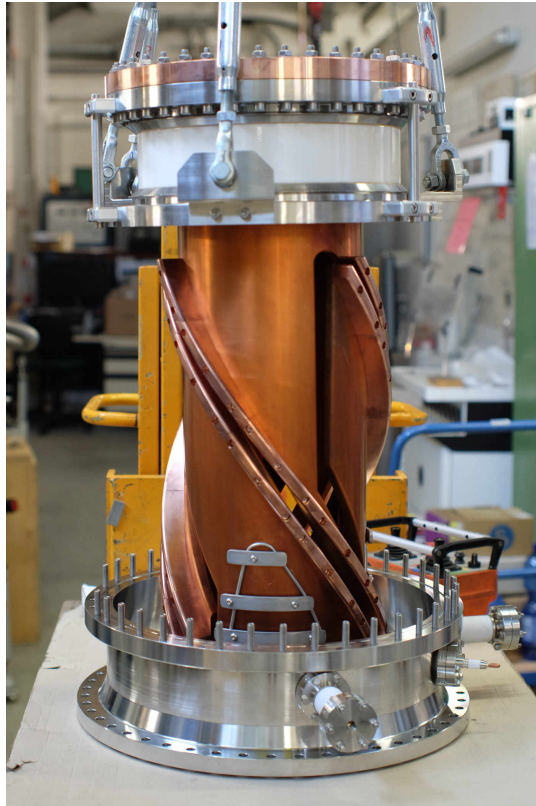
Assembly demonstration of both electrodes without vacuum housing.
